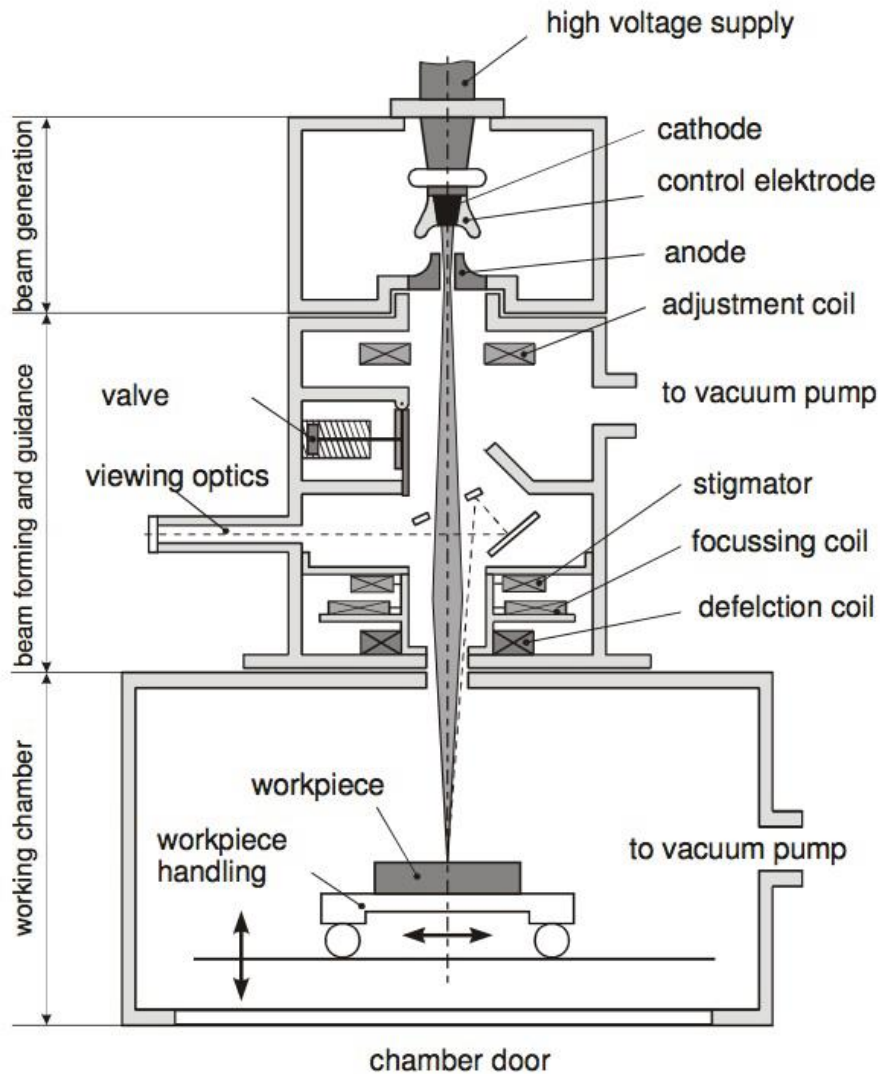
Electron Beam Welding (EBW) Machine [70].
